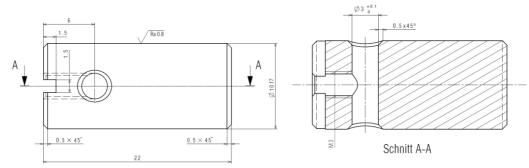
Stainless steel (1.4404) axis with 3mm hole for pin and side-slit for positioning.
